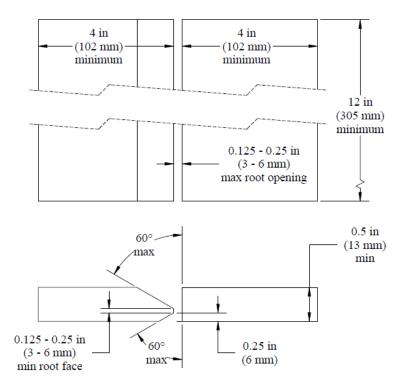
Welder and welding operator qualification plate T greater than 0.5 inches.
